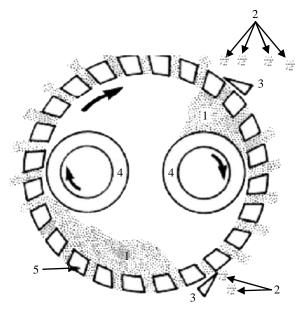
Typical Die and Roller Assembly used for Producing Pellets [1) Meal or Mash; 2) Pellets; 3) Blades; 4) Rollers; 5) Die]
